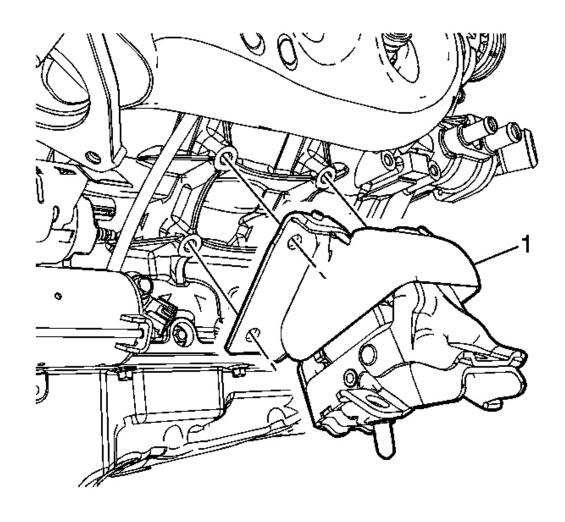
Locating Engine Mount Courtesy of GENERAL MOTORS CORP.
